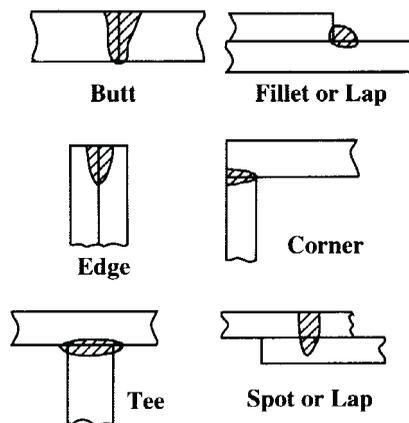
Examples of Laser Weld Joint Designs.
